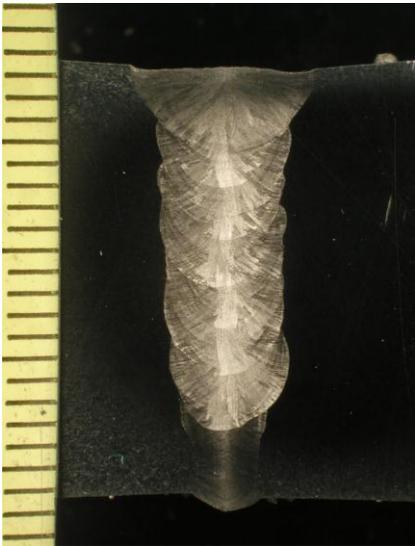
Hybrid Nd:YAG laser multi-pass weld. Thickness 20 mm, AISI316 LN steel, 11 passes, welding speed in root pass 1,3 m/min, filling passes 1 m/min, laser power 3 kW, wire speed varying 9-11 m/min
